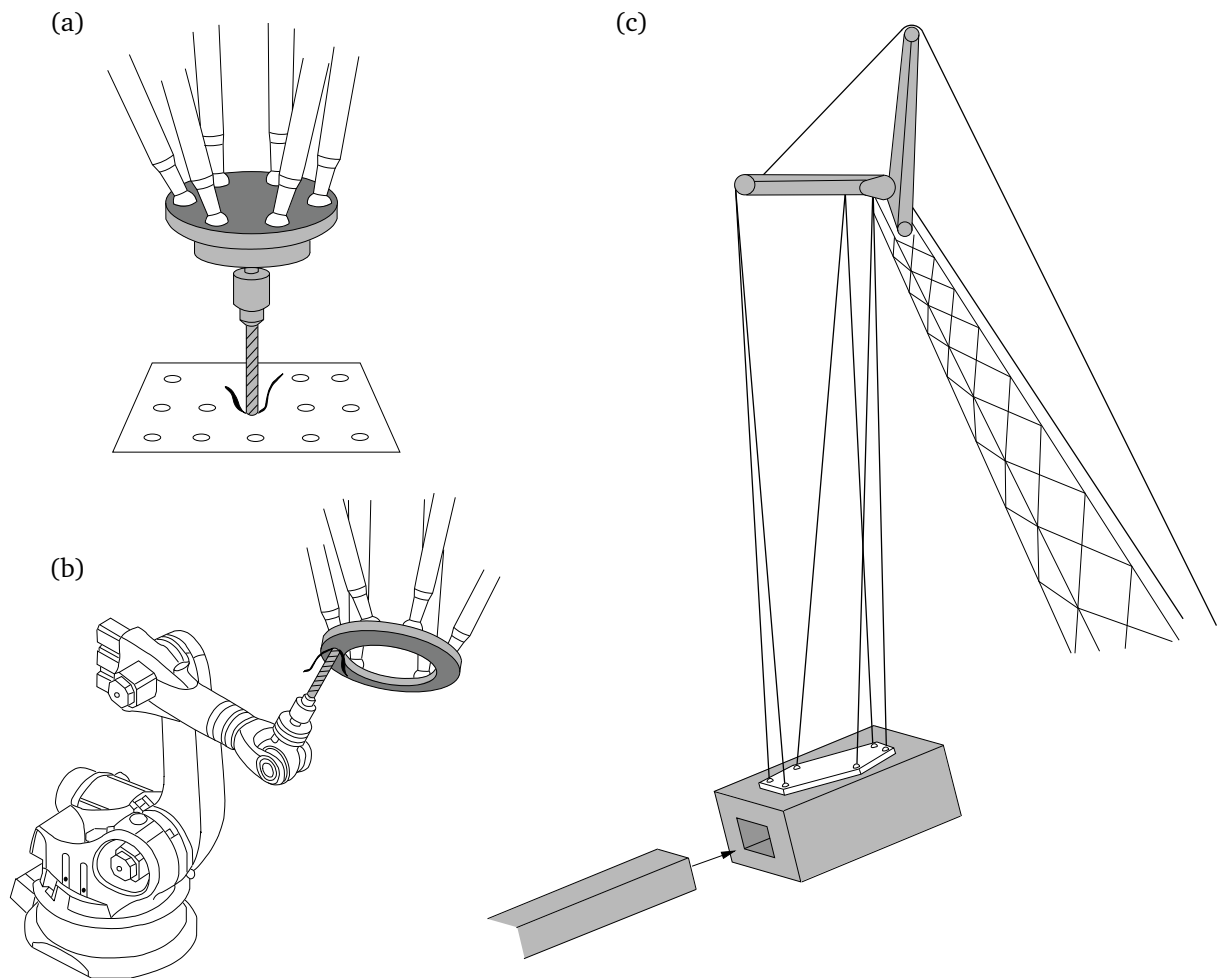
Some schematic examples of typical situations encountered in hexapod applications.
